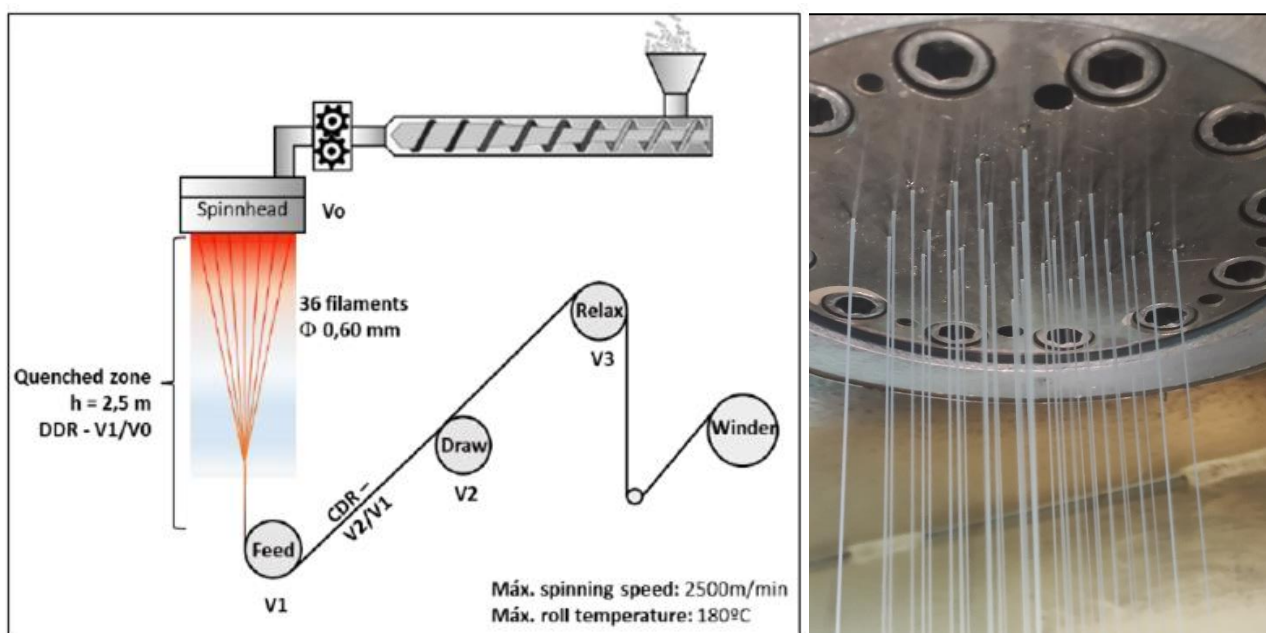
Melt spinning Hills TRC Equipment (left) and spinnhead with 36 filament (right).
